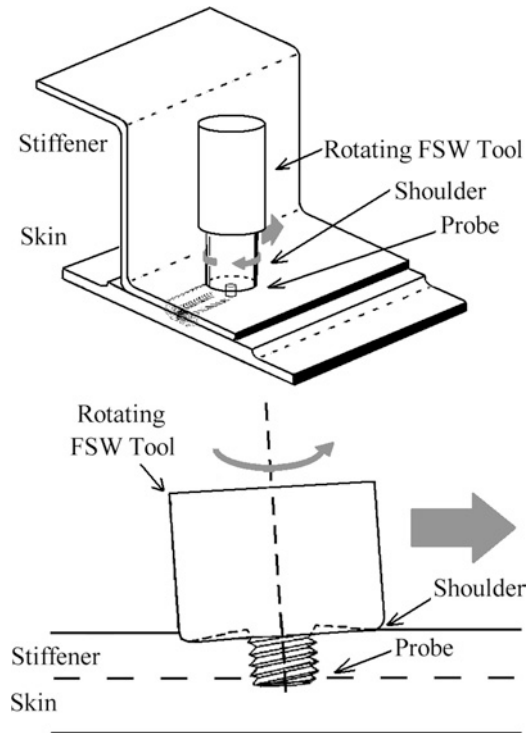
Friction stir welding. The figure depicts the welding set-up for a skin-stiffener lap welding process.
